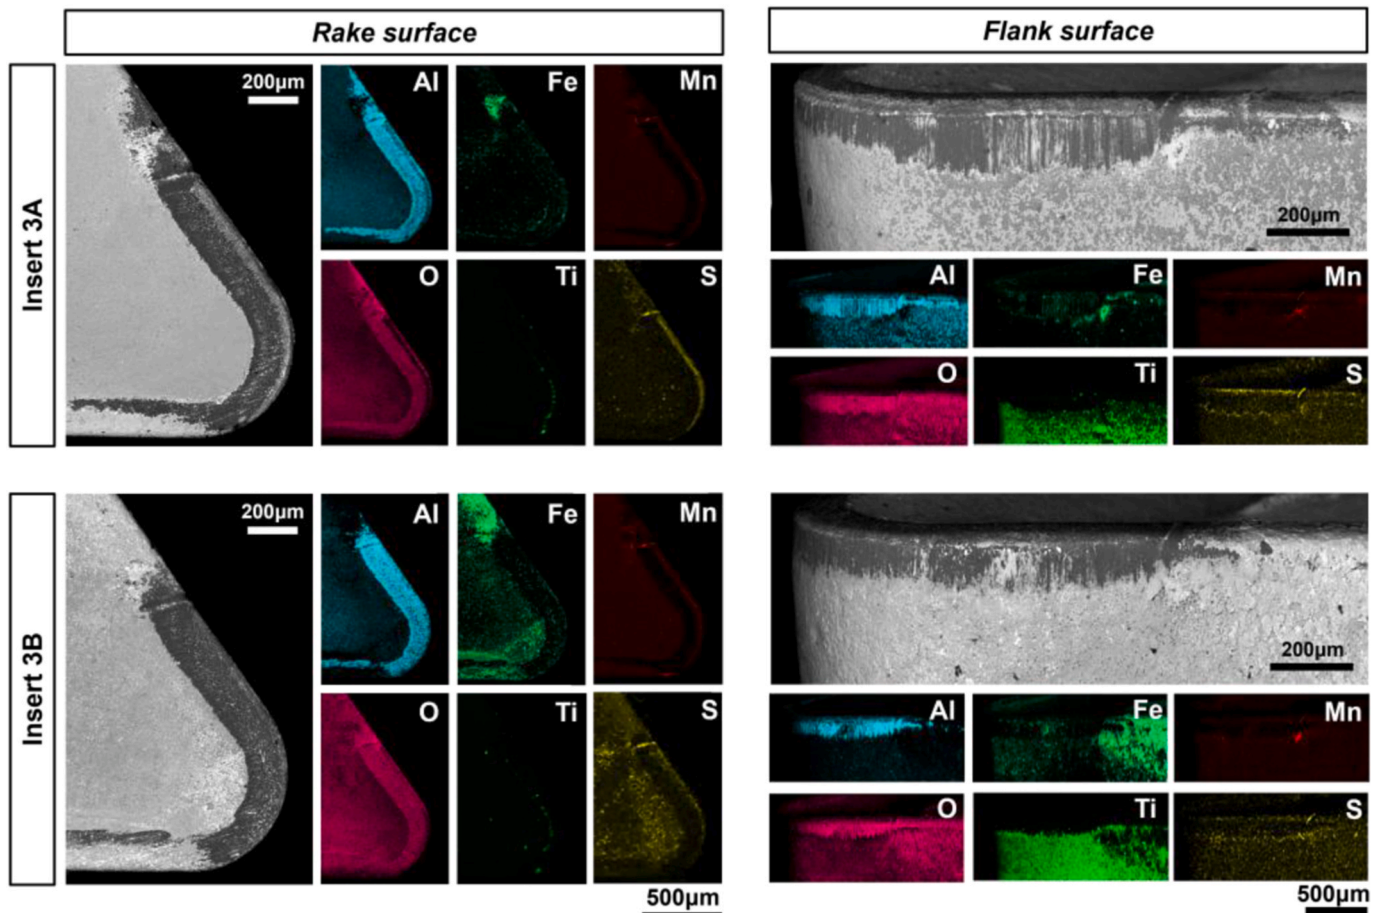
SEM BSE imaging and EDS map analysis of the tools' rake and flank surfaces for cutting condition C03.
